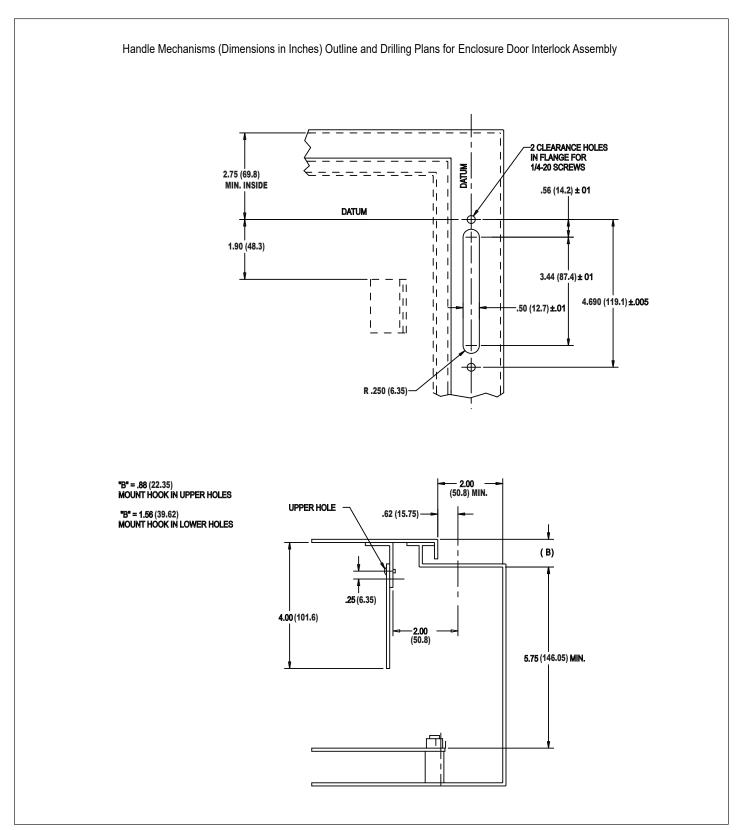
Flange Drilling Plan for Handle and Interlock Blade Mounting Dimensions.
